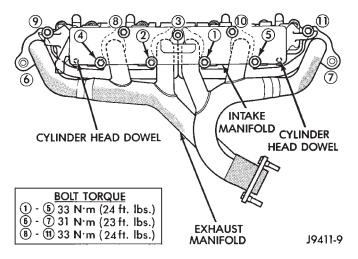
Intake/Engine Exhaust Manifold Installation (4.0L Engine)
